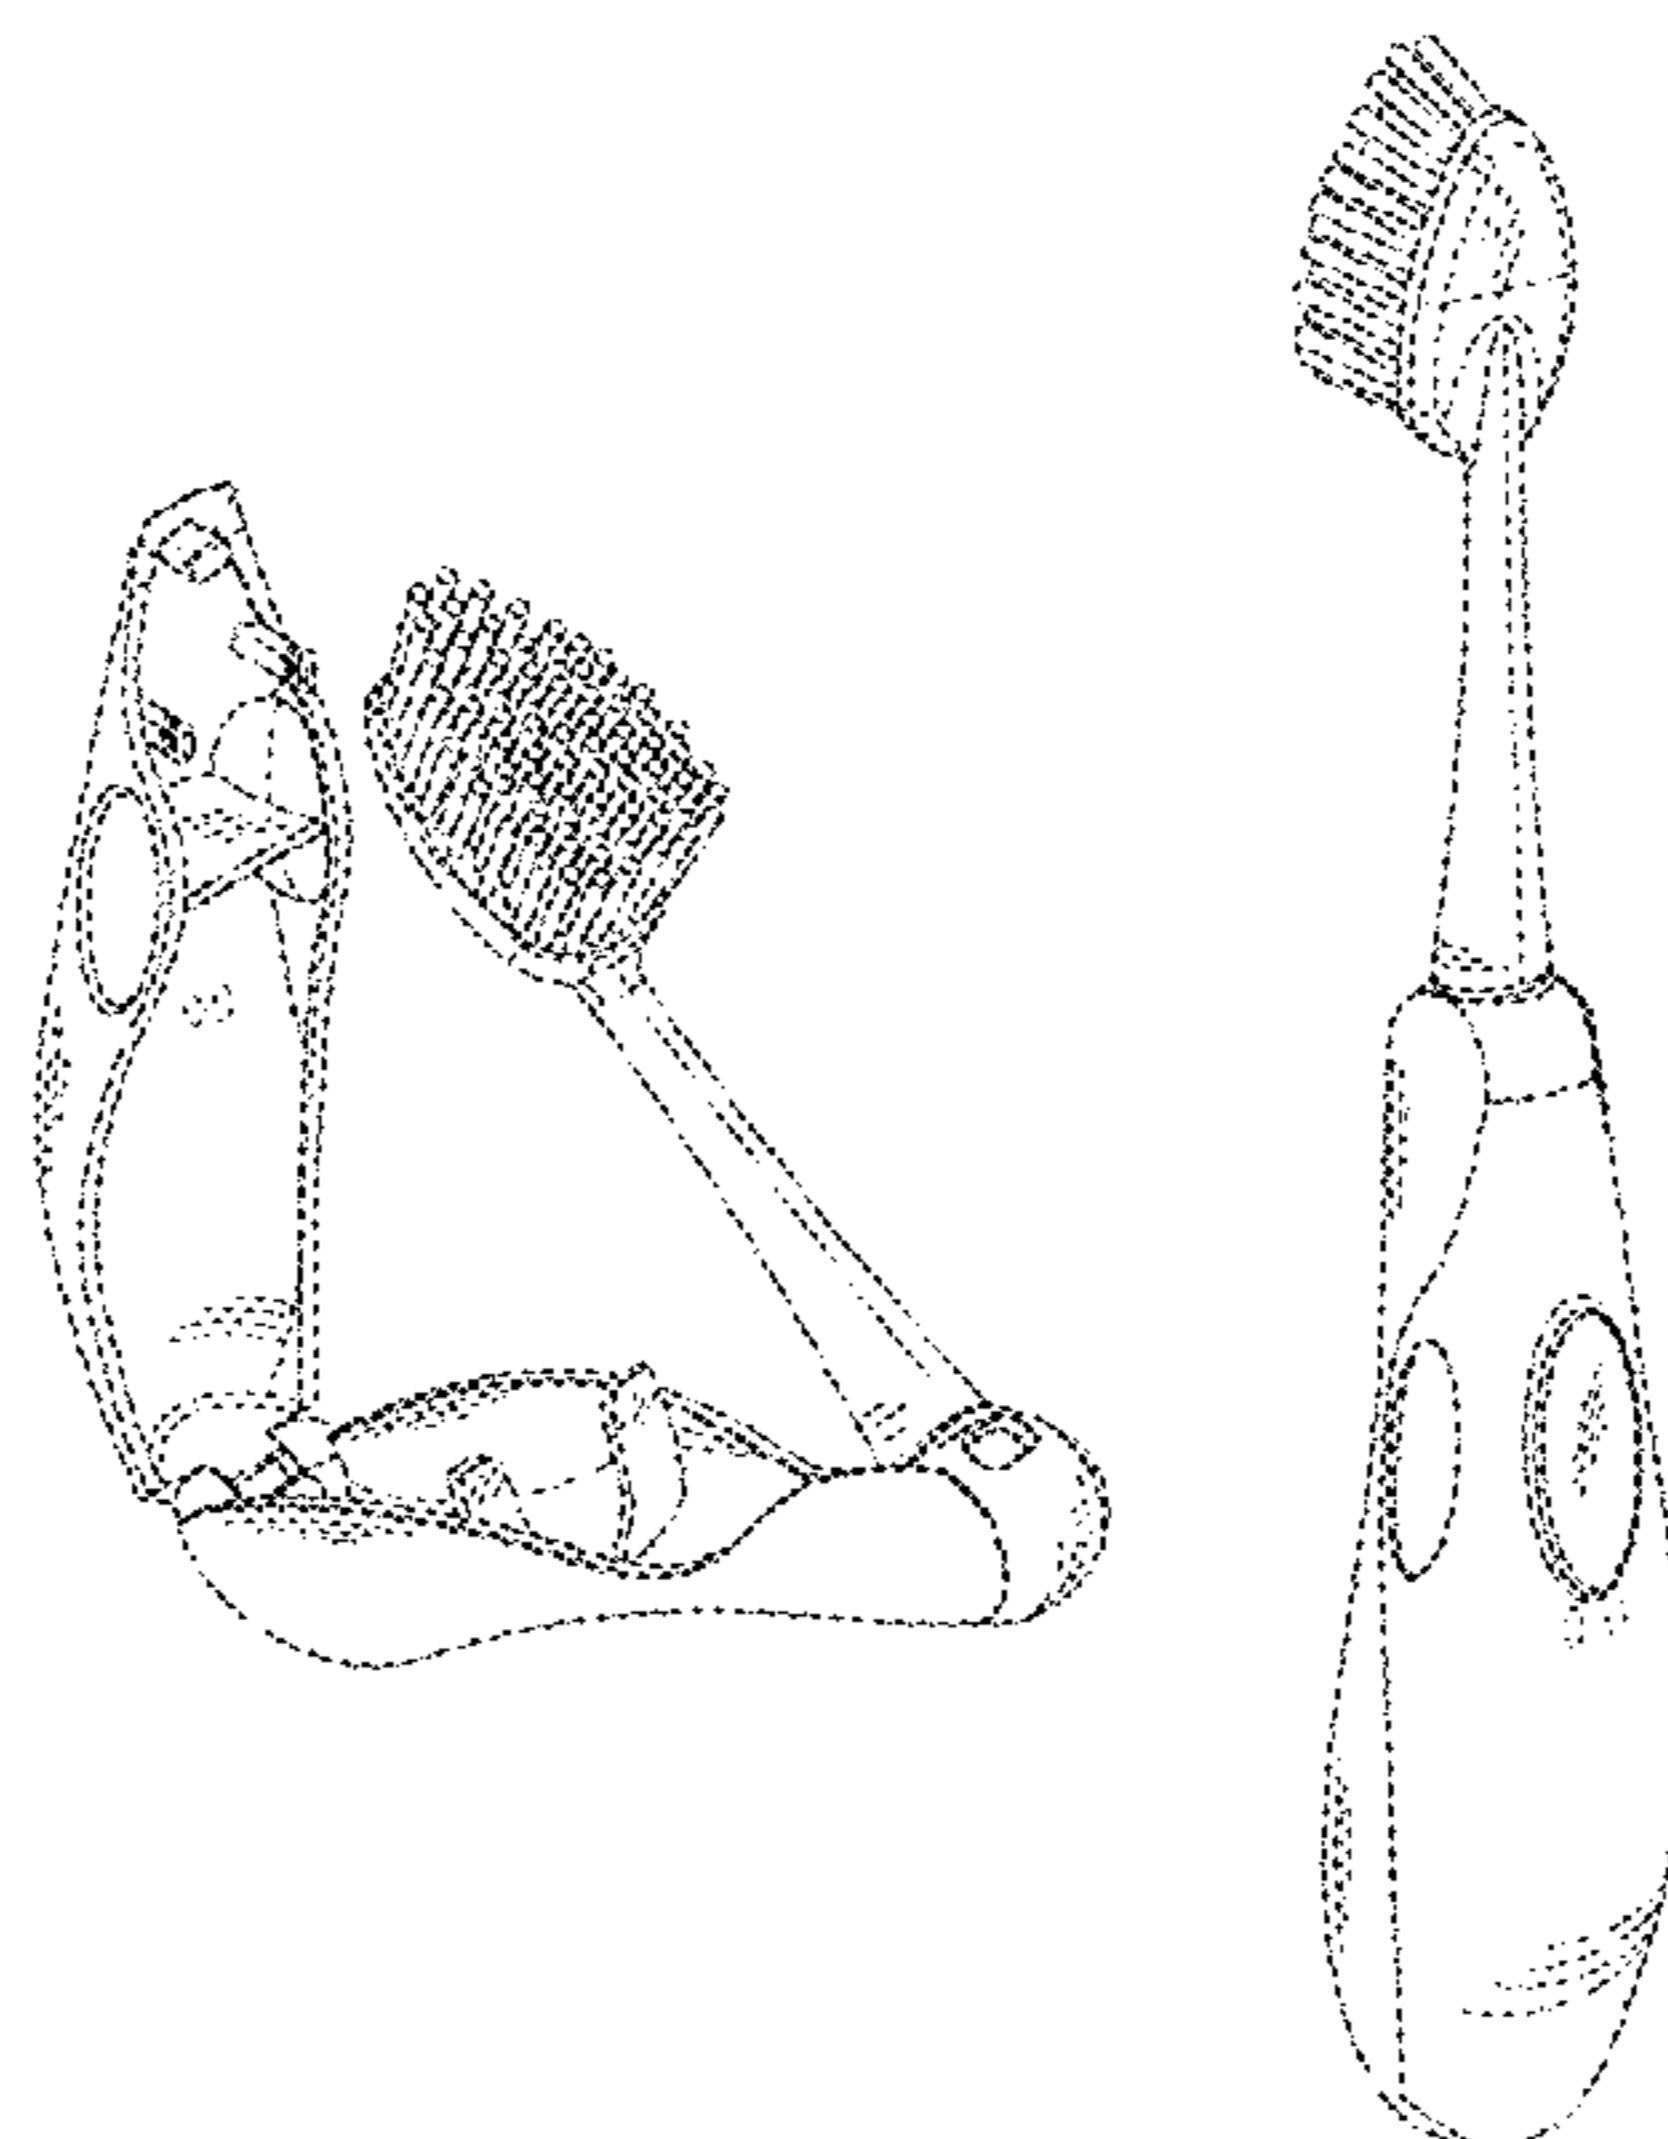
is a back isometric view of a folding toothbrush with a replaceable head in an open orientation;
